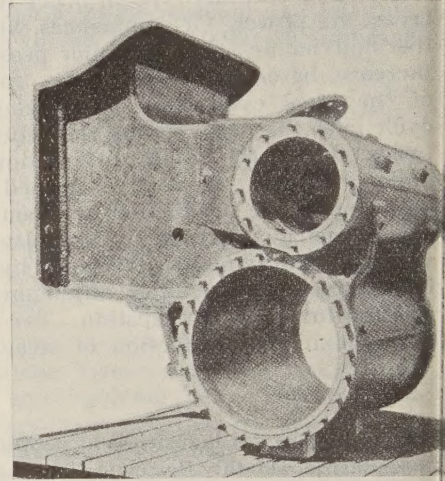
Completed cylinder and steam chest, studded and tested hydraulical.
